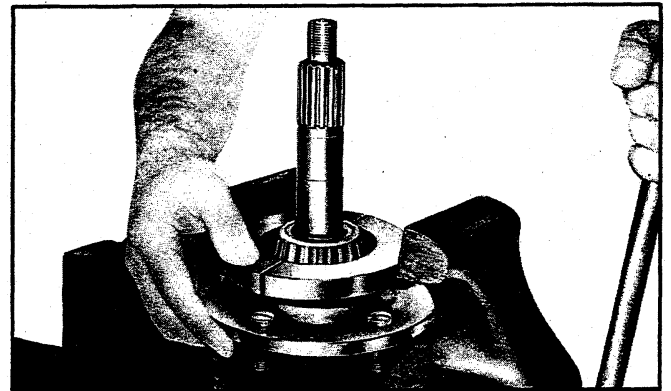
Unseating Drive Spindle Outer Bearing (Corvette)
